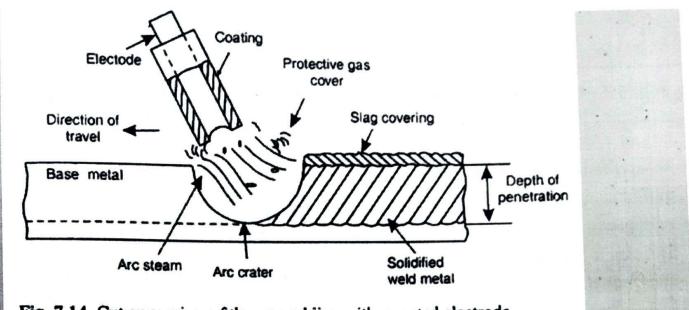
Cut away view of the arc welding with a coated electrode.
